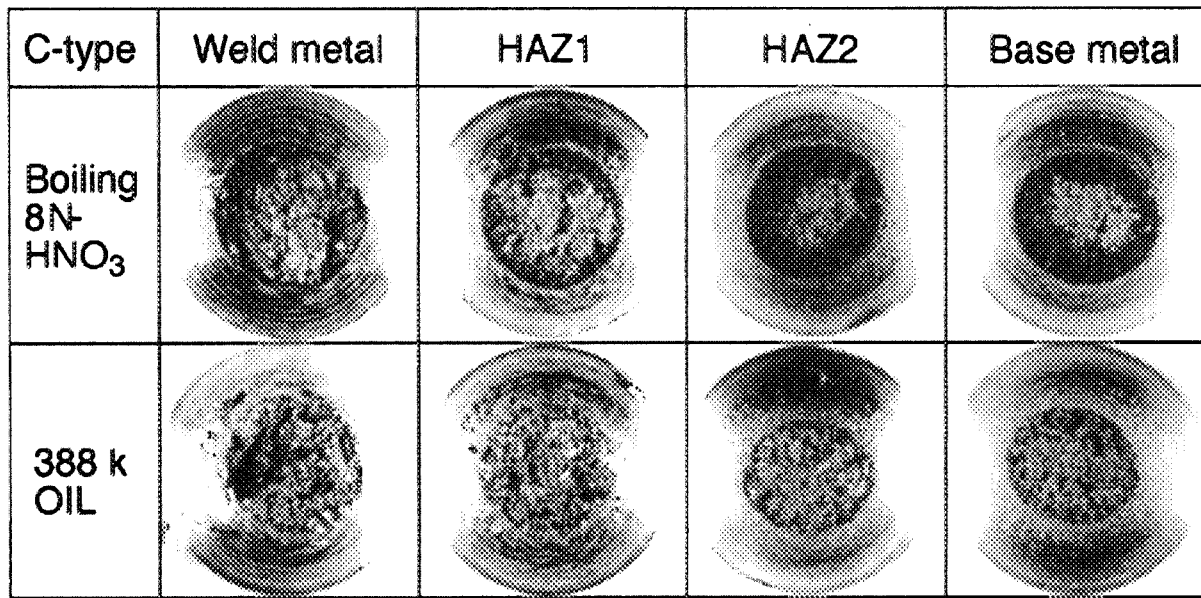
Optical photographs of fracture surfaces after SSRT in notch type specimen.
